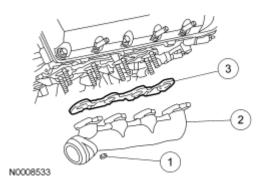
Locating Exhaust Manifold Courtesy of FORD MOTOR CO.
